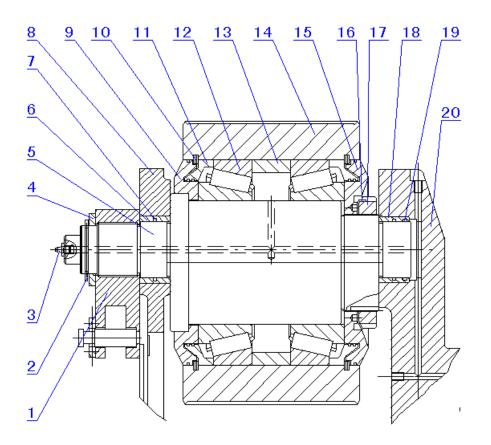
SZLH678 (768) MX granulating machine pressure roller assembly
